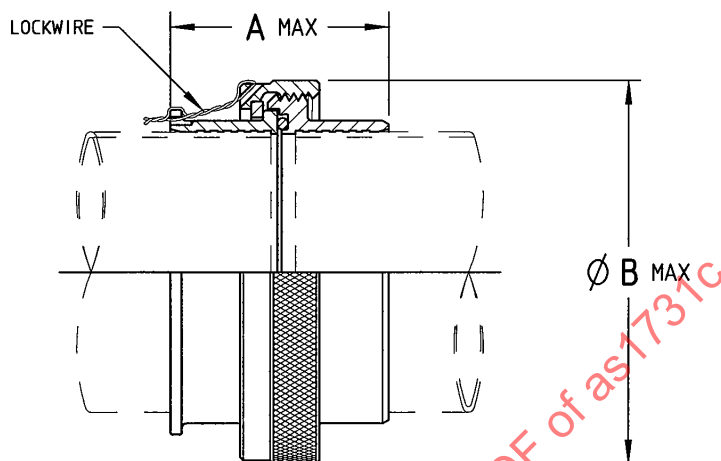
TYPE I COUPLING - ASSEMBLED VIEW
